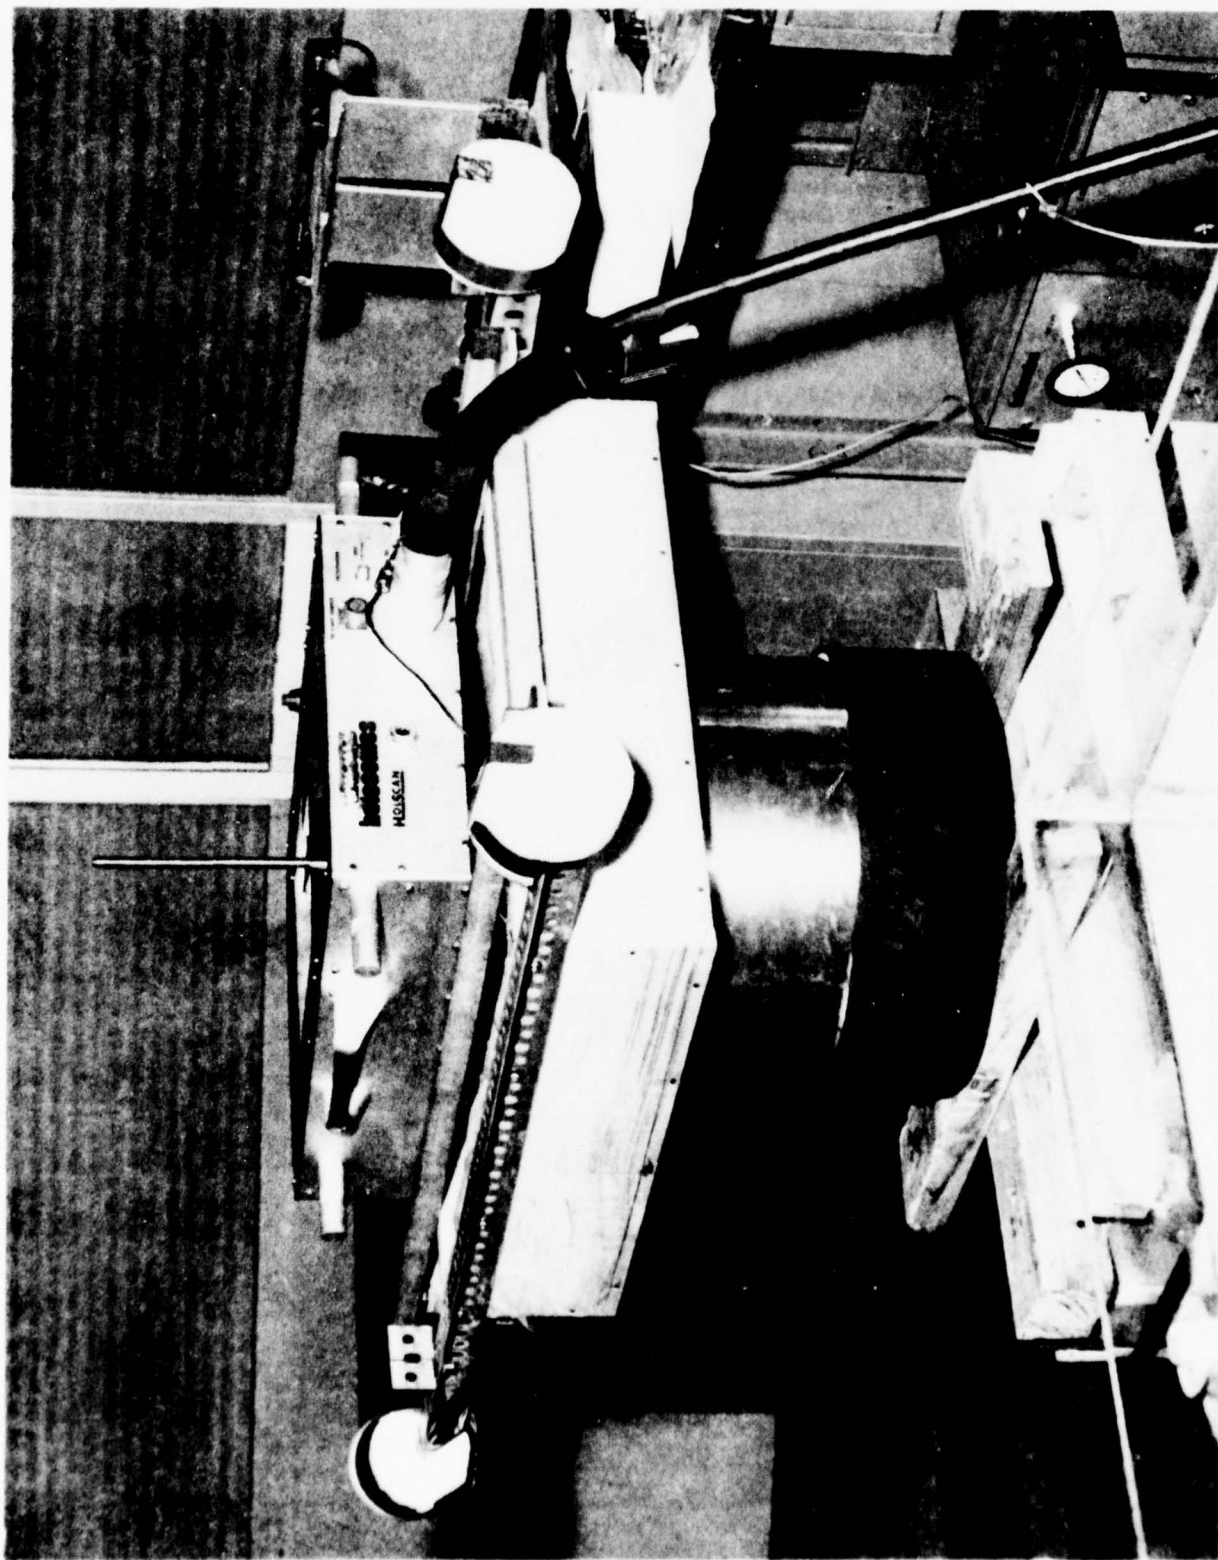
A. Fixture for holographic inspection of rotary forge billet.
